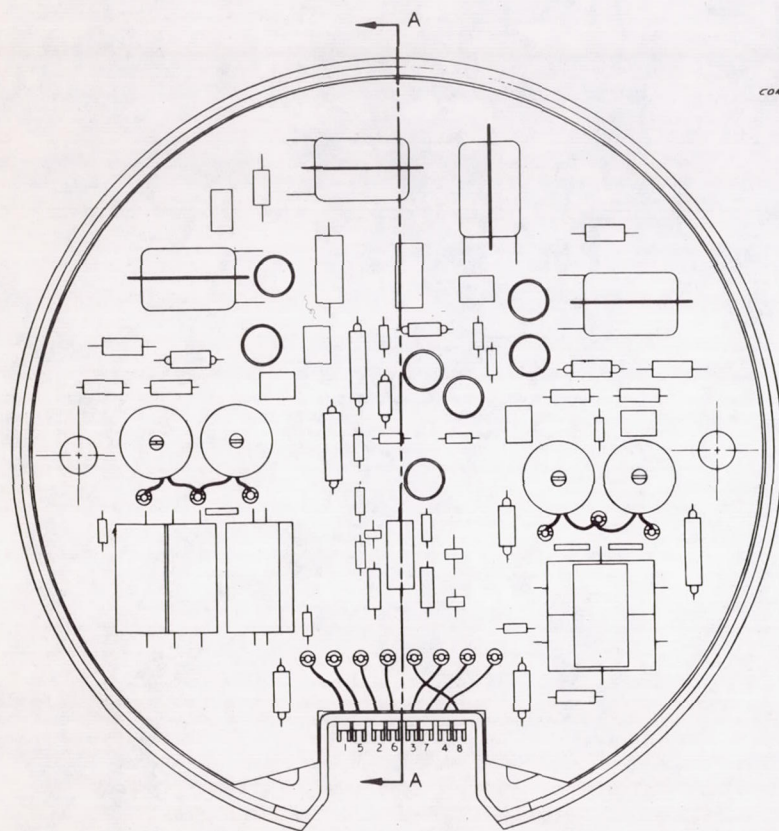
SUBCARRIER OSCILLATOR DECK "A" ASSEMBLY
